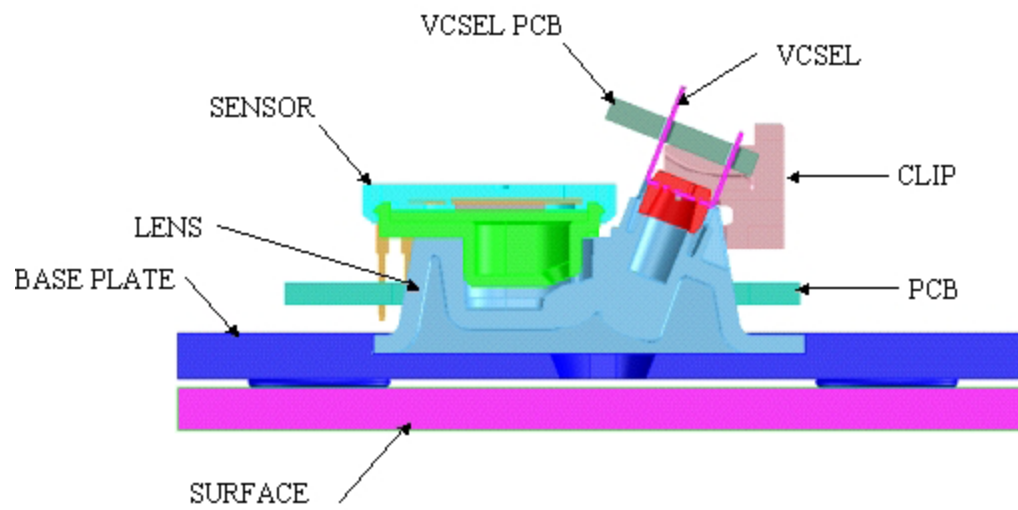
Sectional view of PCB assembly highlighting all laser mouse components (laser mouse sensor, clip, lens, VCSEL, PCB, and base plate)
